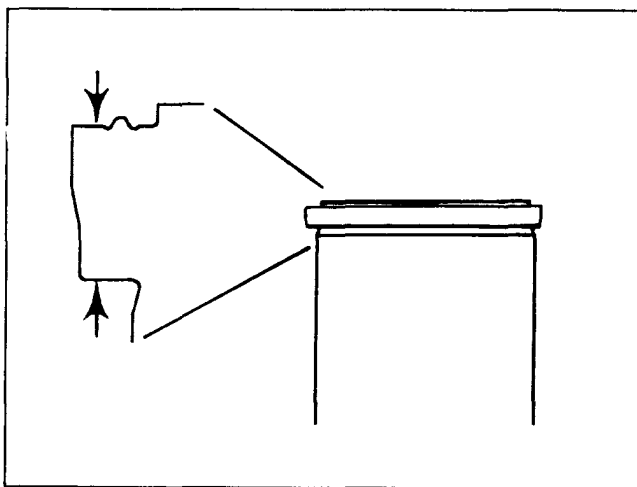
, (N101114). Cylinder liner flange thickness measuring point
